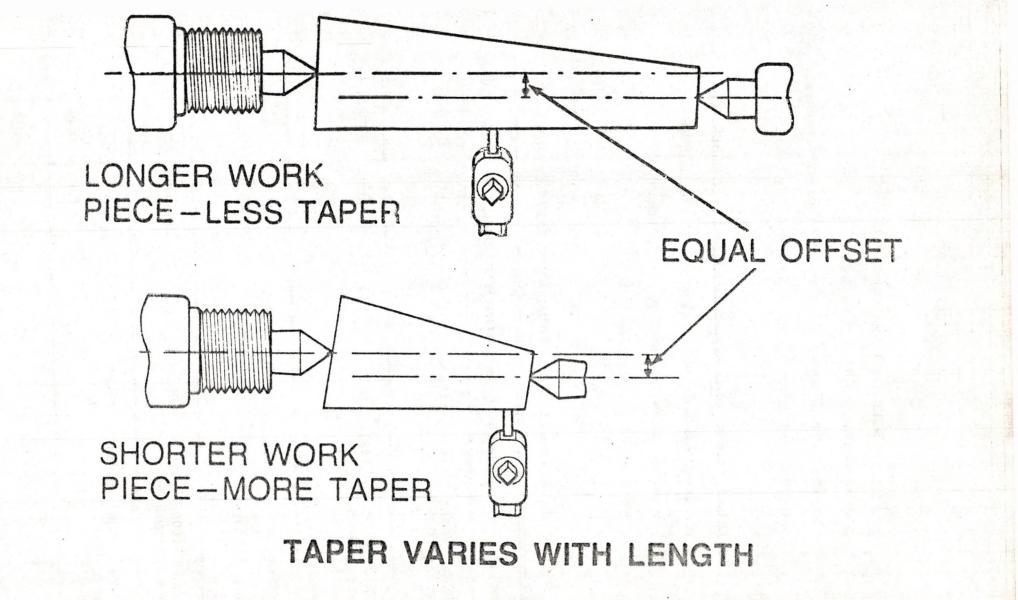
Second press run. Tailstock offset for machining tapers on a metal lathe.
